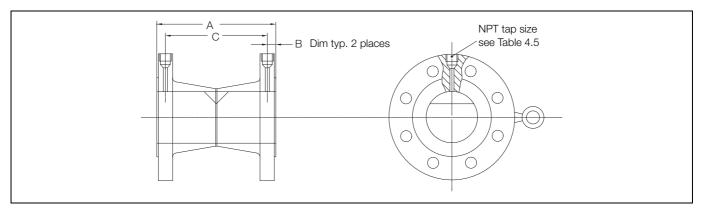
Model WMP with RFWN end flanges – sizes 50 to 150 mm (2 to 6 in.)
